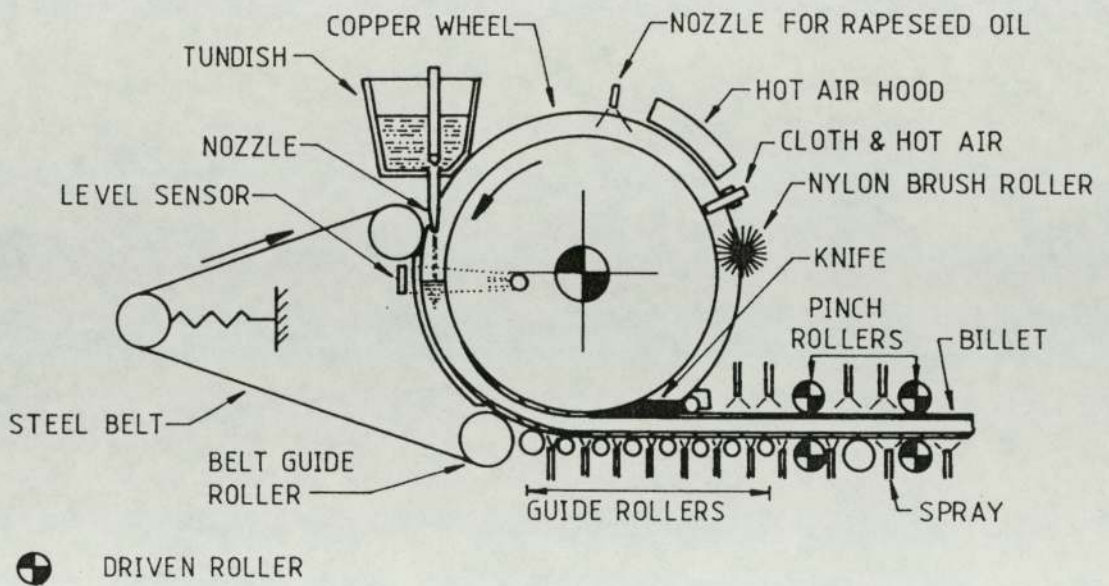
BELT-WHEEL TYPE BILLET CON-CASTER.
